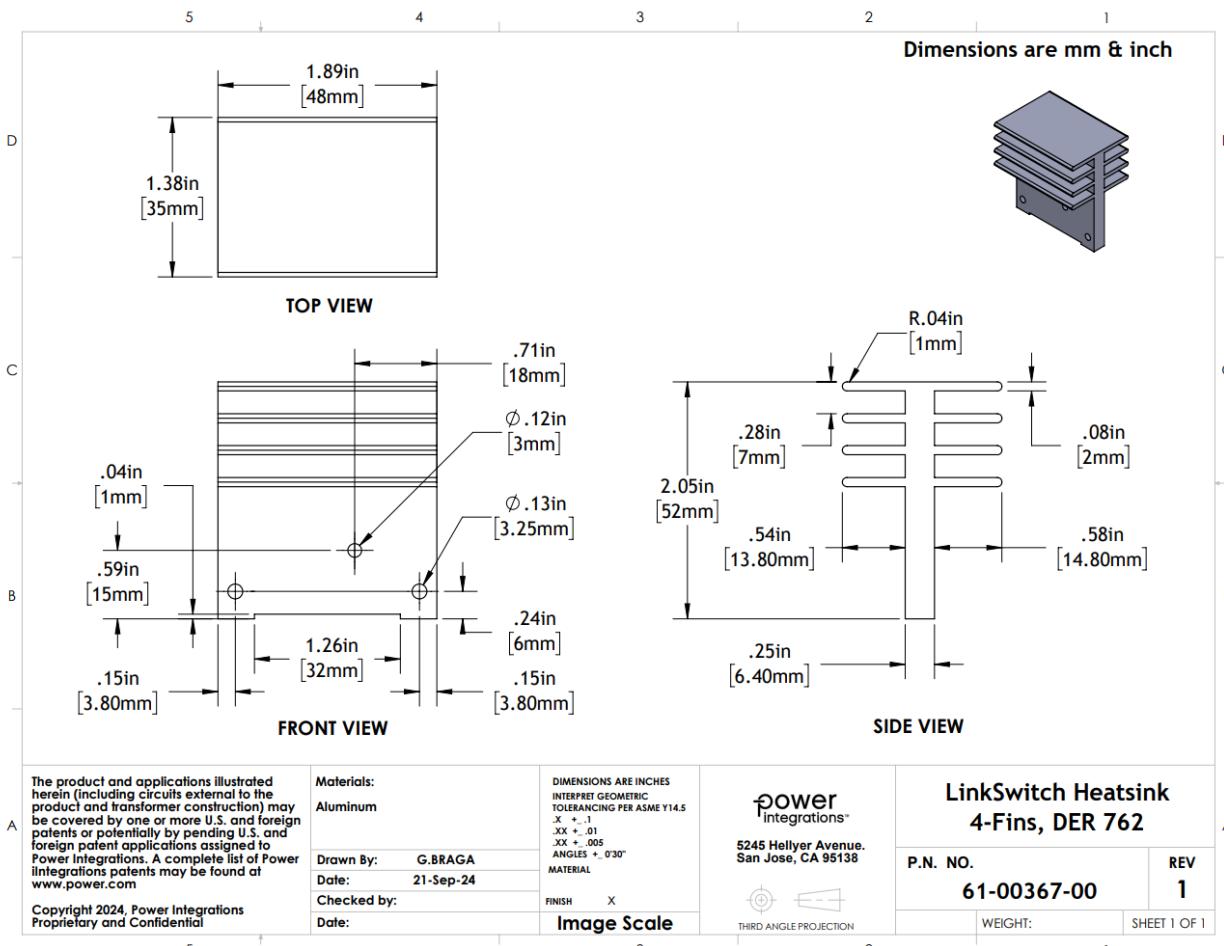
DER-762 LinkSwitch-HP Heat Sink Metal Drawing.
